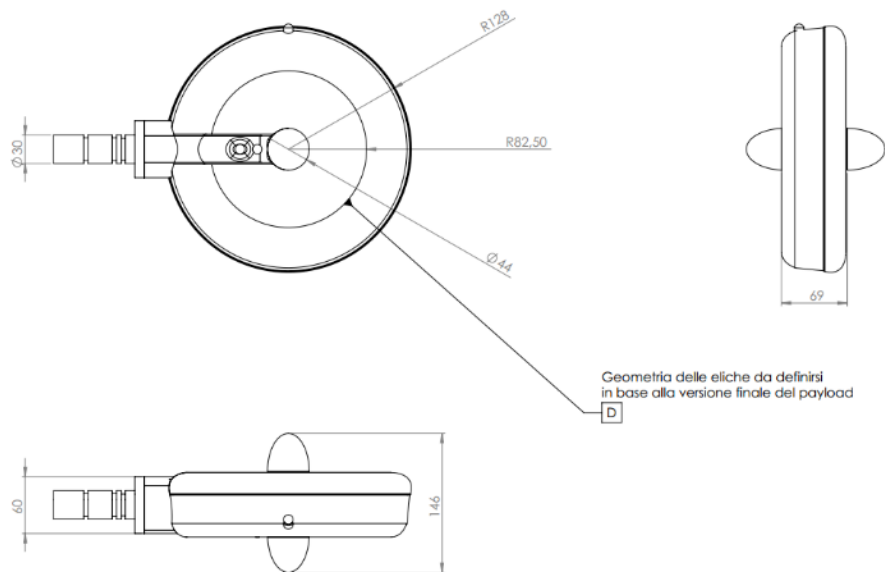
Engineering drawings of the propellers by Gabri SRL.
